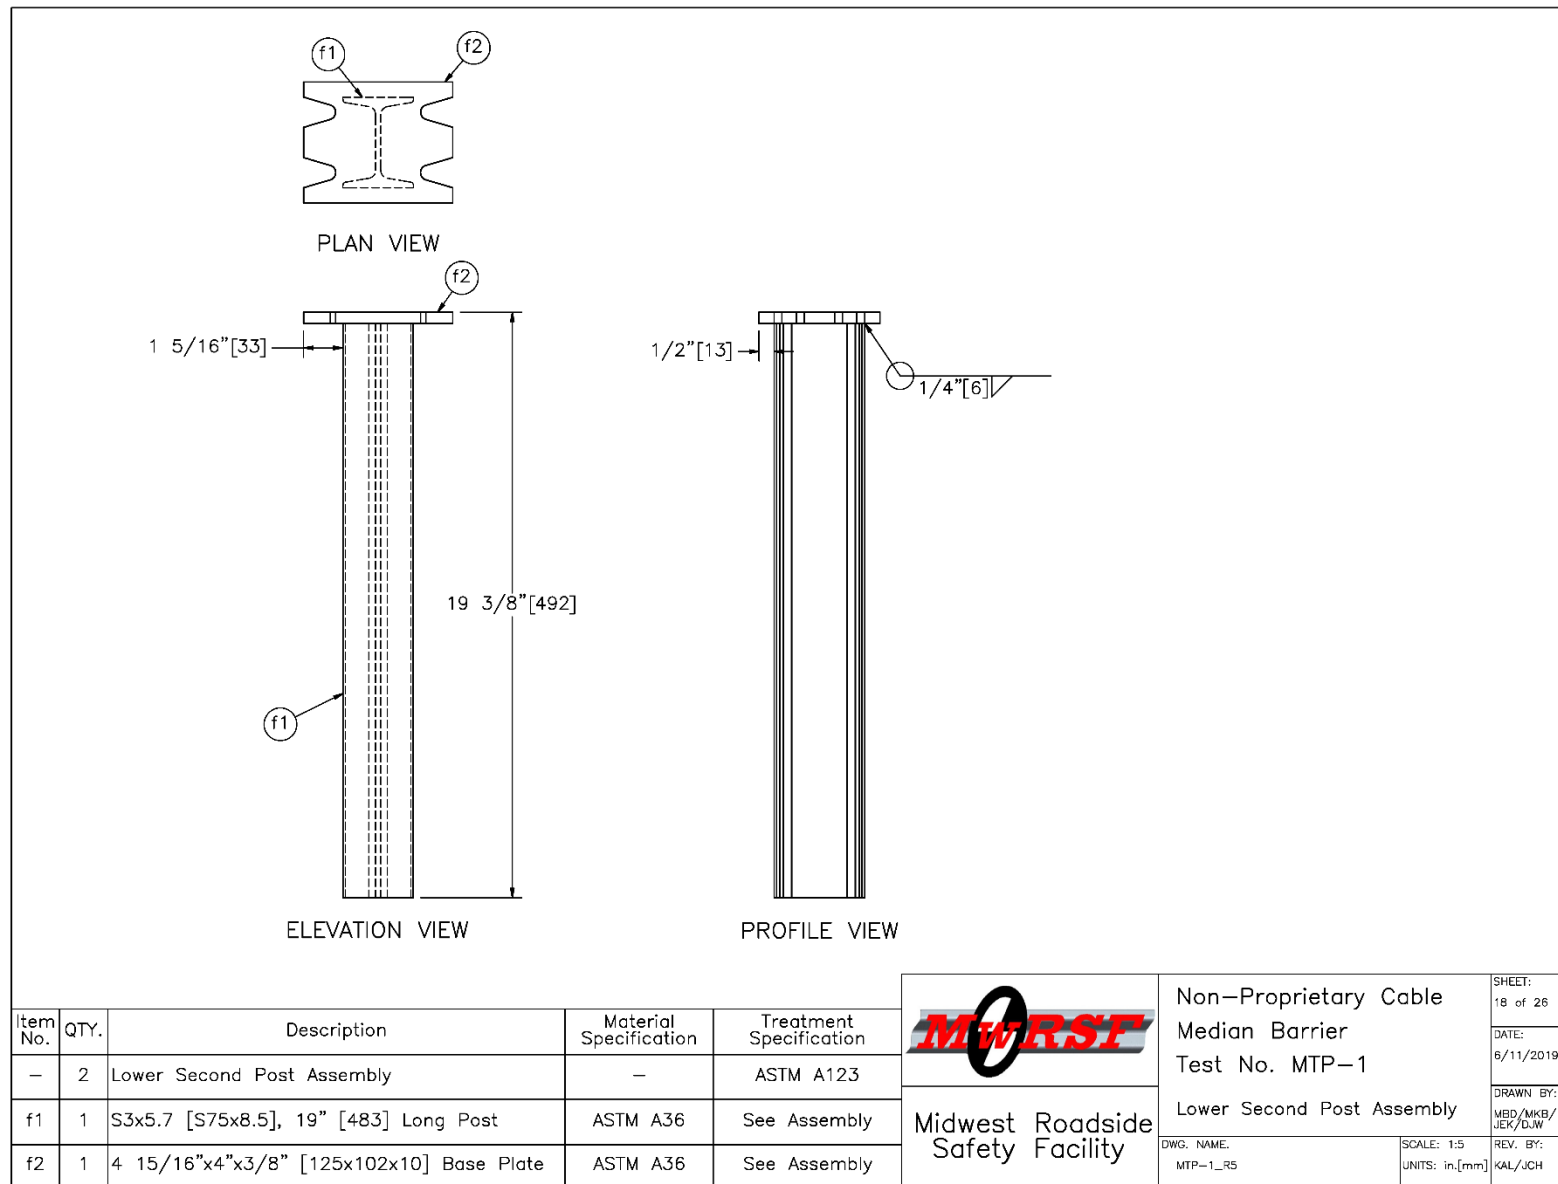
Lower Second Post Assembly, Test No. MTP-1
